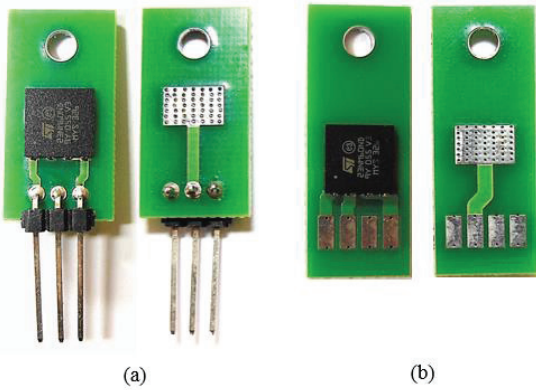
Front and reverse sides of adaptive daughter boards for 8x8 QFN: (a) design TO-220-compatible with 3-pin connector, (b) design 4-pin edge connector.
